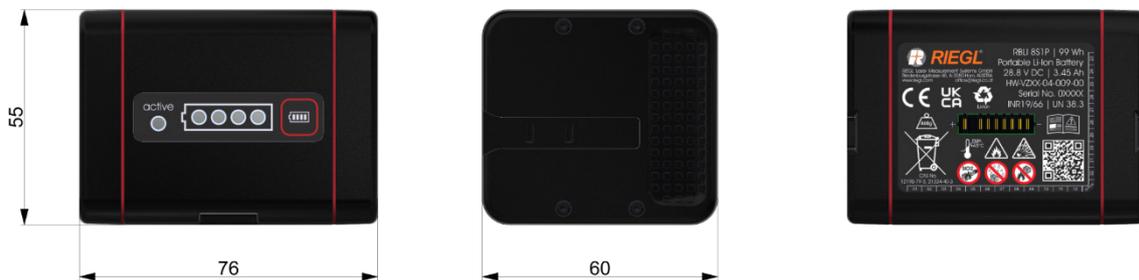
Dimensional Drawing of the *RIEGL* RBLI 8S1P, all dimensions in mm
